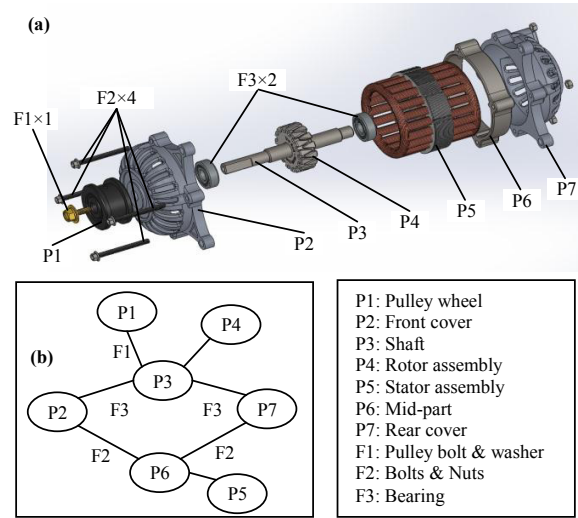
An alternator model: (a) exploded view; (b) graph representation.
